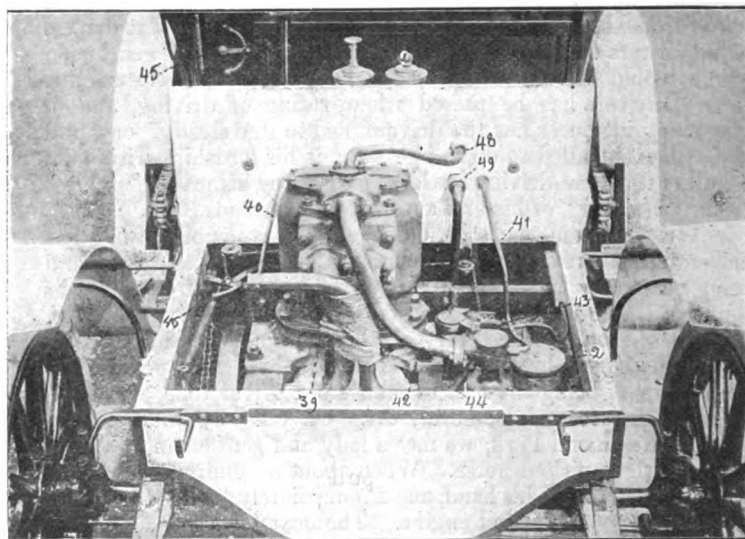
VIEW OF FRONT OF CAR WITH BONNET REMOVED.
